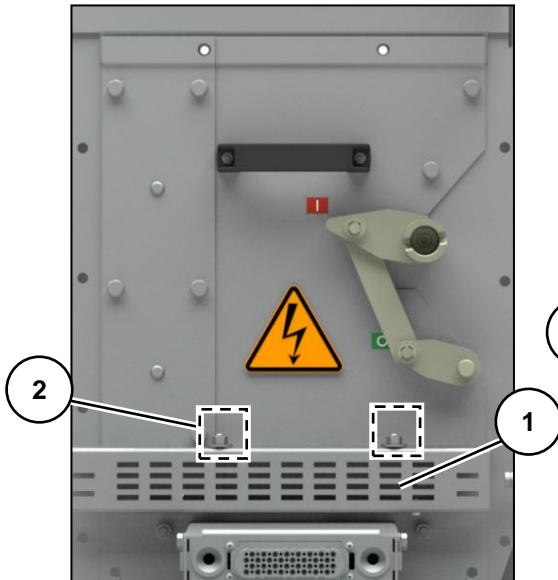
Contactor panels with panel width 435 mm only: 2 bolted joints on the heater
